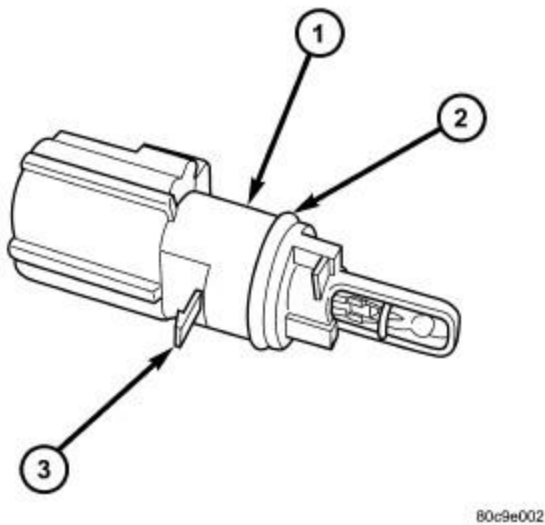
IAT Sensor, O-Ring Seal & Release Tab
